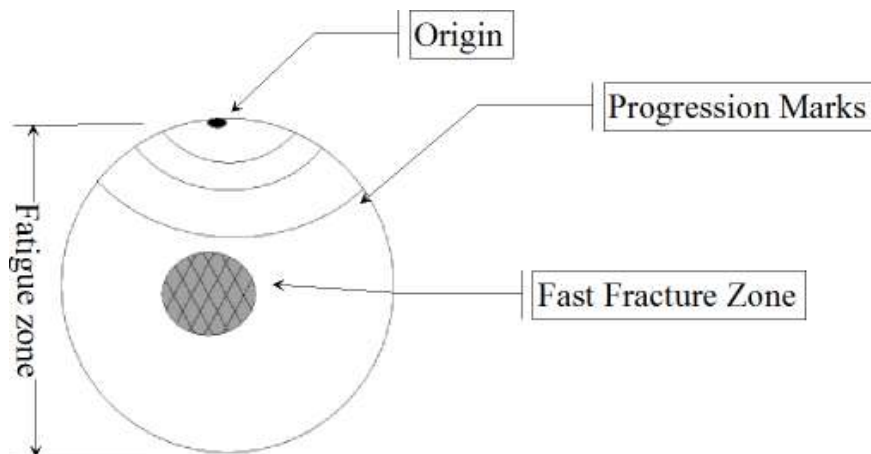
The macroscopic features of the fracture surface of a failed fatigue sample
